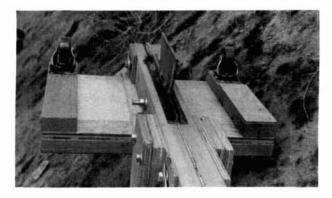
Bottom view shows blade, tack-welded to angle iron screwed into position. Wire guide tube is welded to trailing edge of blade (foreground).
